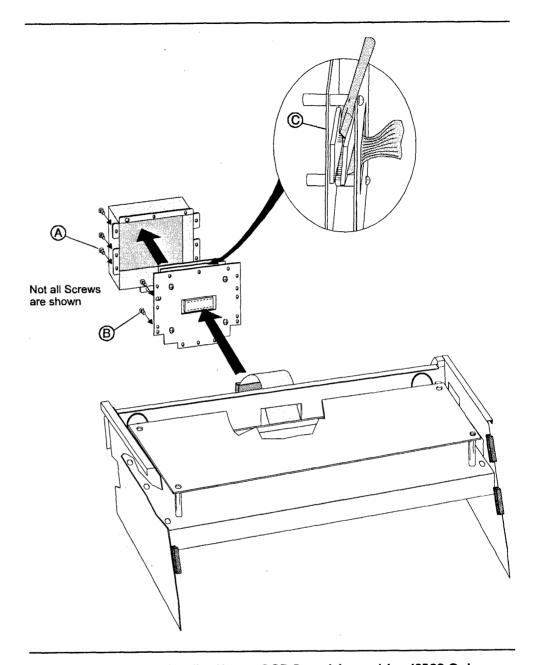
Removing the Upper CCD Board Assembly - IS520 Only
